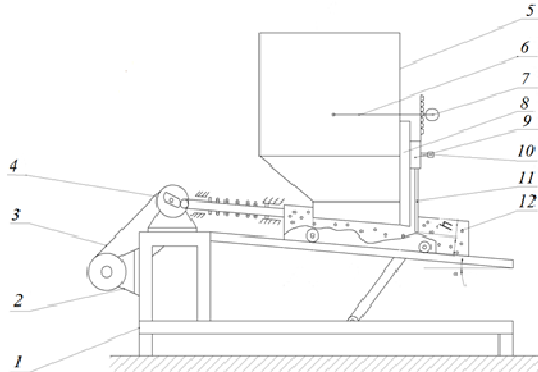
Multi-component vibration dispenser: (1) frame (2) electric motor (3) belt drive (4) eccentric drive (5) hopper (6) manual gear drive (7) gears (8) adjusting mechanism (9) sliding bars with gear racks (10) clamps (11) shutters and (12) tray.
